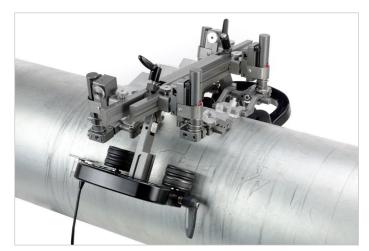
Long seam scanning semi-automated carbon steel weld inspection.
